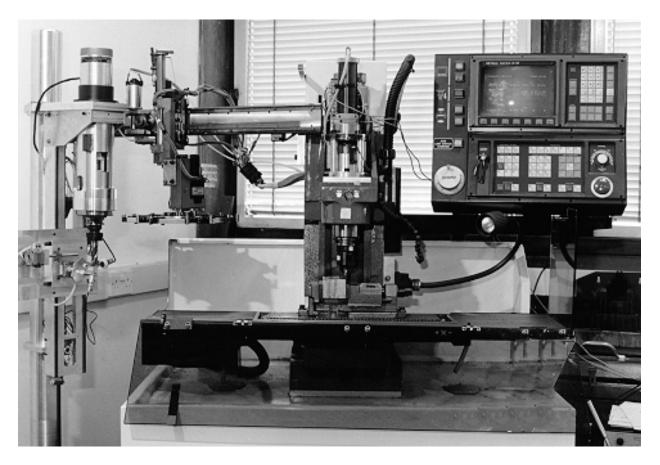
Integration of the Laser Inspection Apparatus with a CNC Machine Tool
